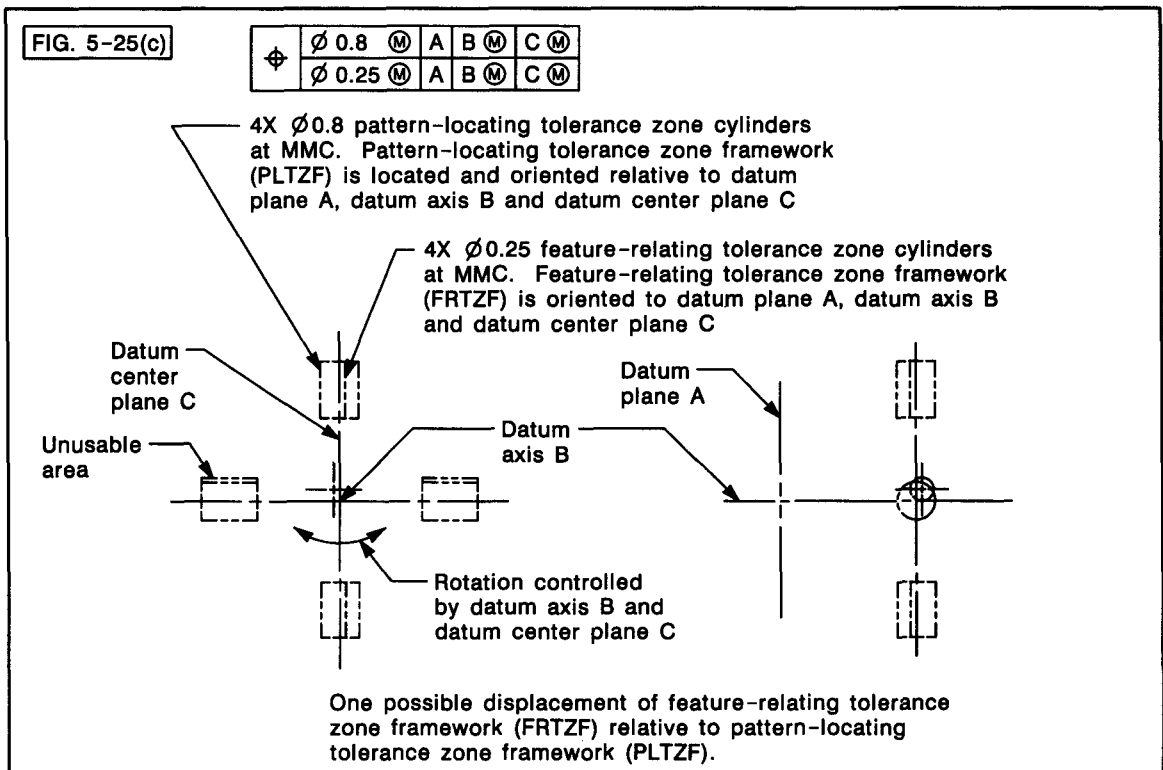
RADIAL HOLE PATTERN LOCATED BY COMPOSITE POSITIONAL TOLERANCING (CONT'D)
